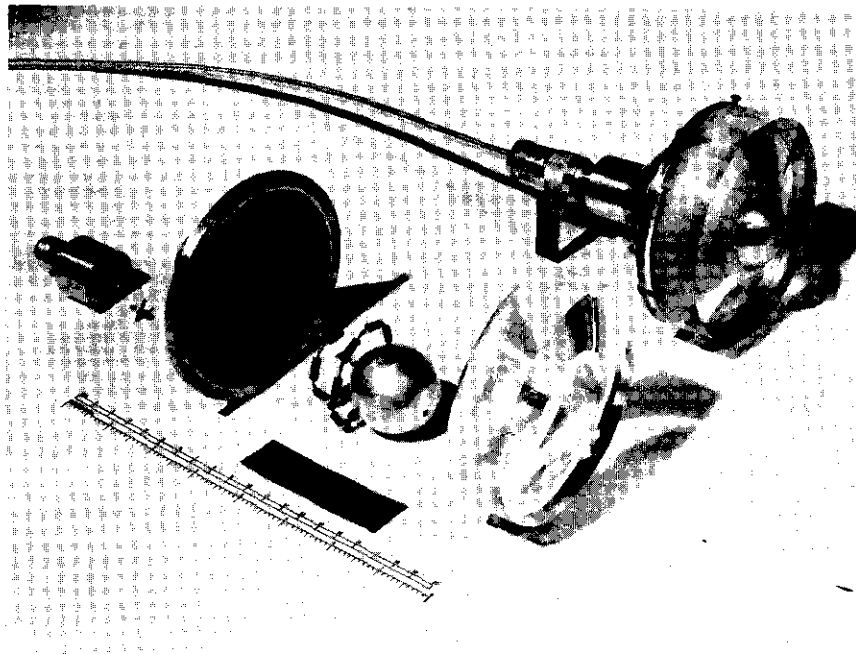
High-voltage Probe, Exploded View and Assembled
